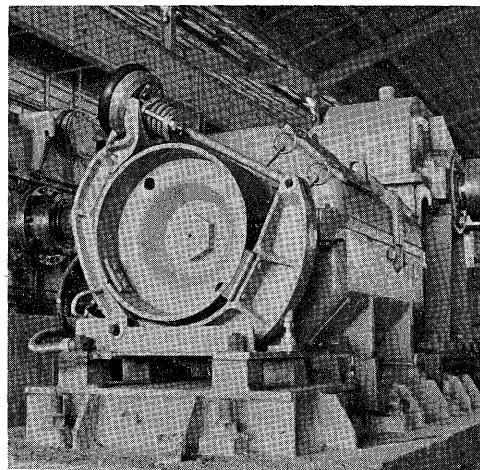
Magnetic brake RC 543-14 installed on a machine
